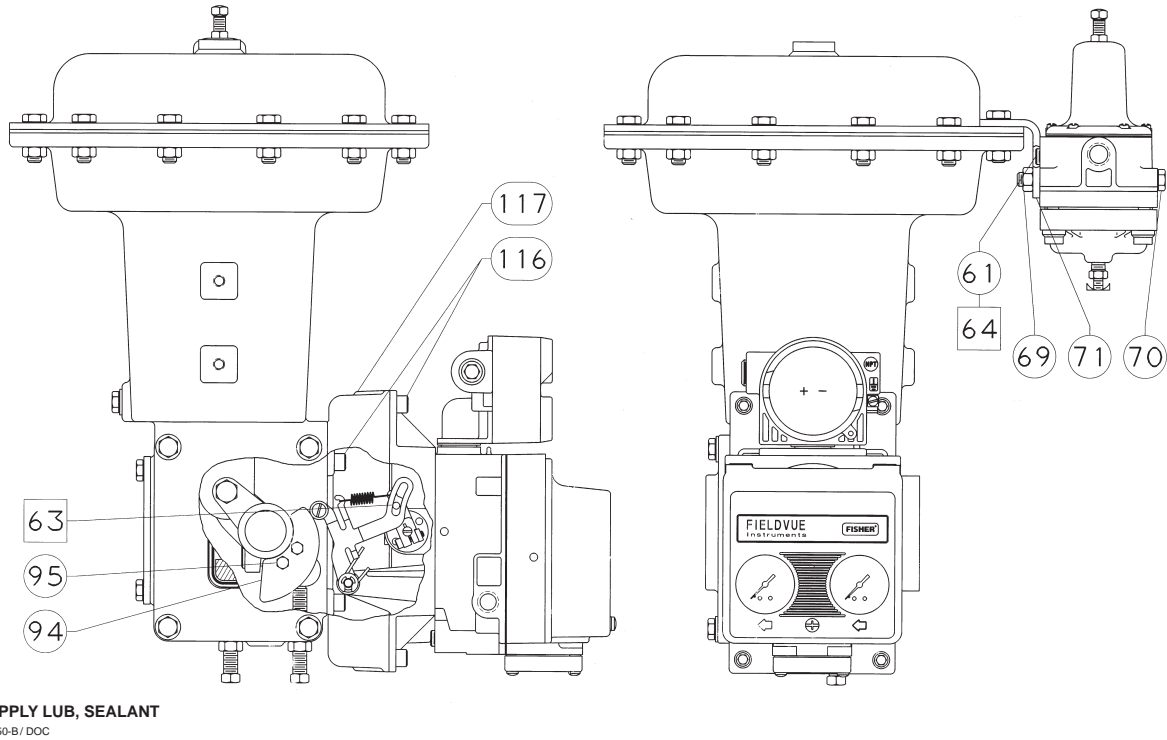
Type DVC5020 Digital Valve Controller Mounted on Type 1052 Size 33 Actuator with Casing-Mounted Filter Regulator
